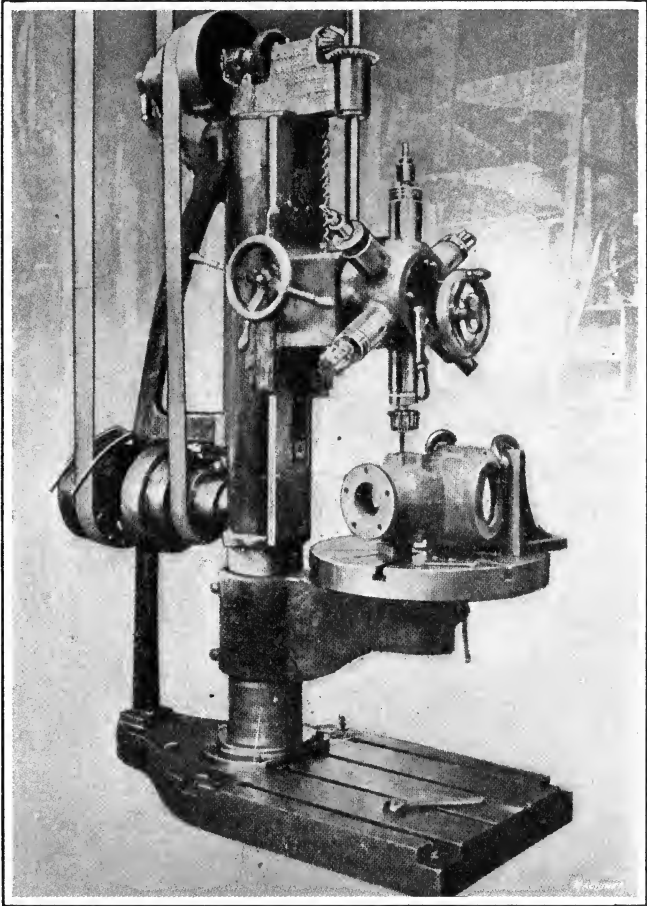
Turret Type of Drilling Machine in which Turret revolves in Vertical Plane
